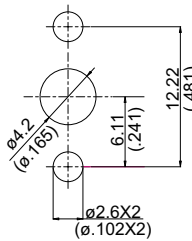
2-hole flange Fig. 6-2: square flange
